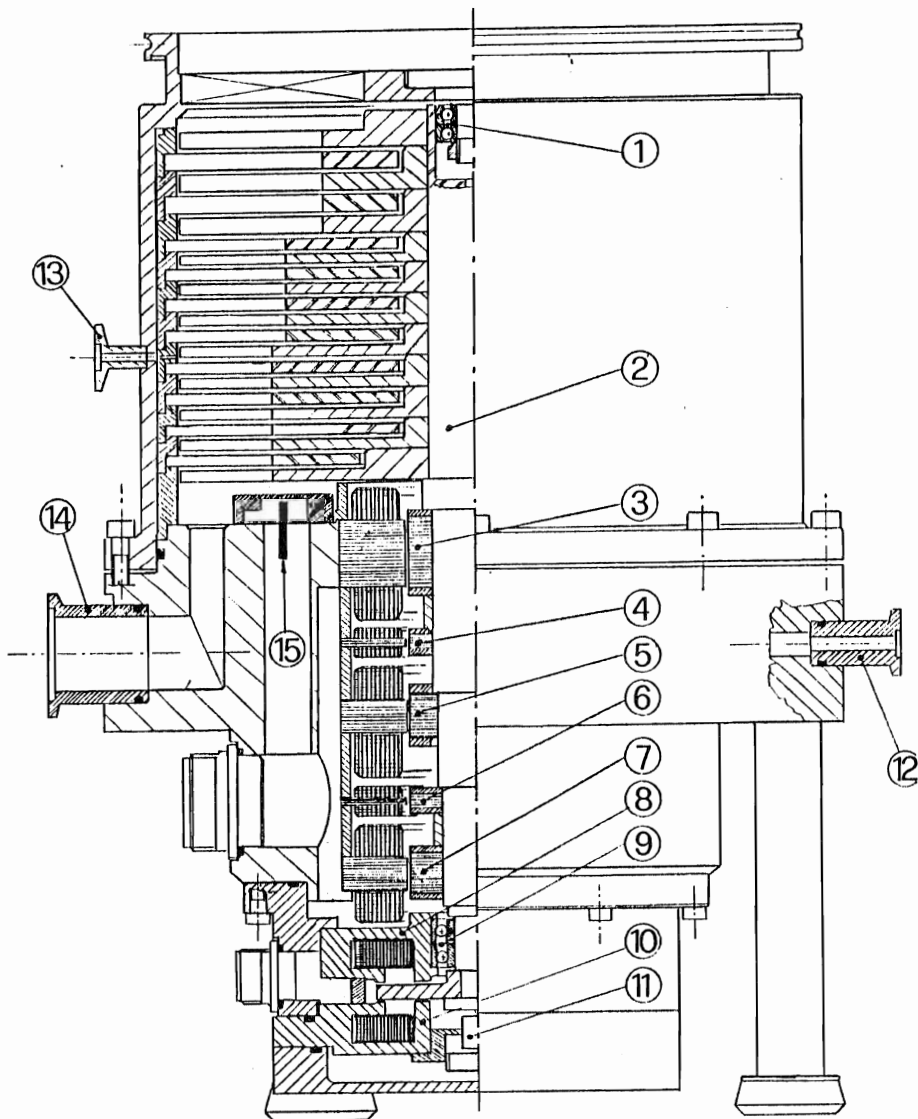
Sketch of the machine. 1, 9 emergency bearings; 2 shaft; 3, 7 radial actuators; 4, 6 radial sensors; 5 electric motor; 8, 10 axial actuator; 11 axial sensor; 12 inert gas inlet; 13 venting flange; 14 forevacuum connection; 15 speed sensor.
